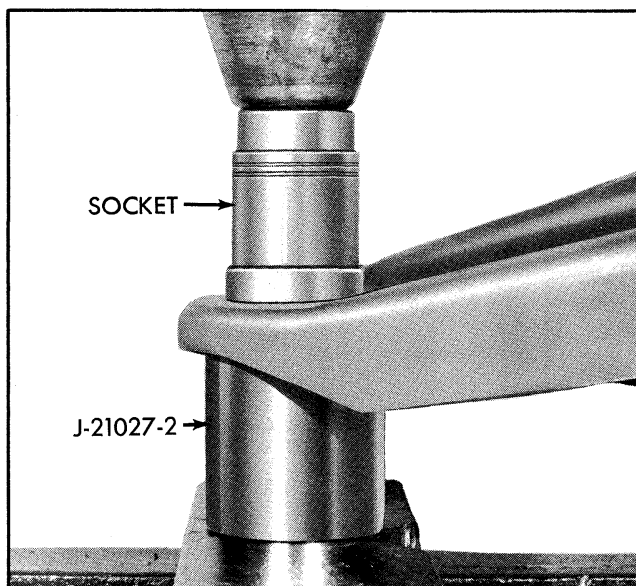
Pressing Ball Joint from Lower Control Arm
